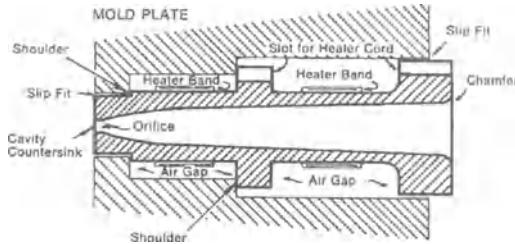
Heated sprue bushing eliminates trimming and sprue scrap and reduces molding cycle for thermoplastics.
